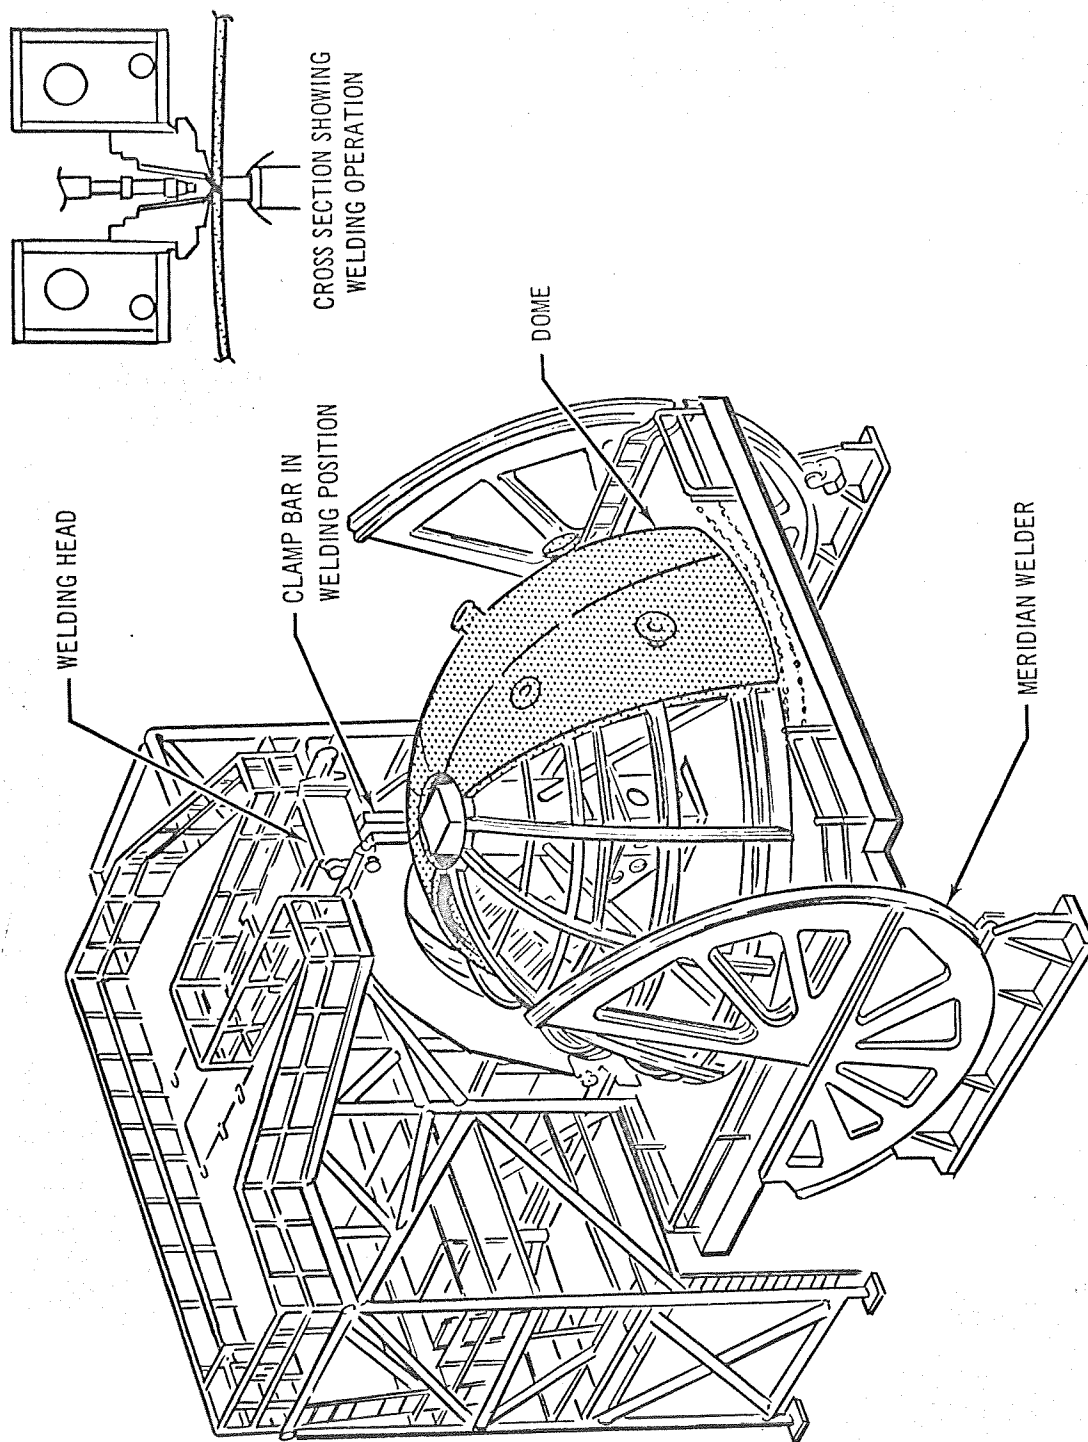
Saturn S-IVB Fixture for Seam Welding Gore Segments for Fwd Hydrogen, Lox and Common Bulkhead Domes
